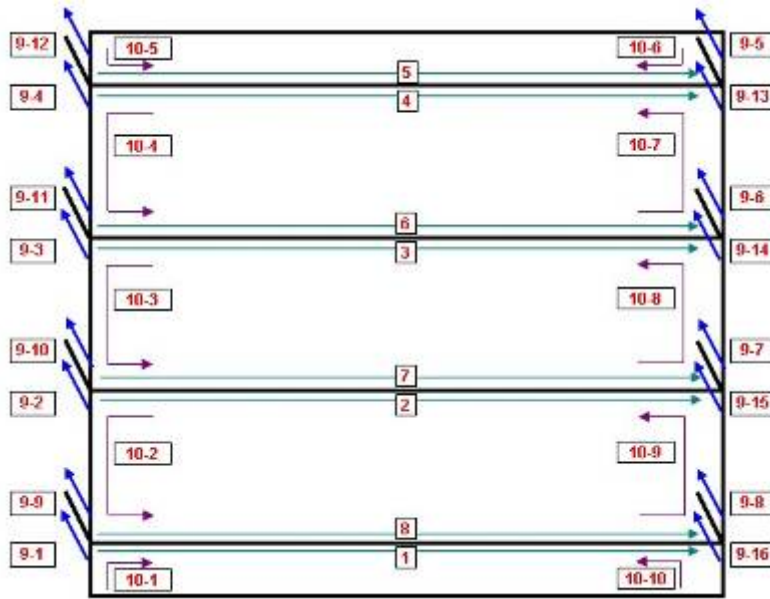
The order of welding for fabrication of the test structure
